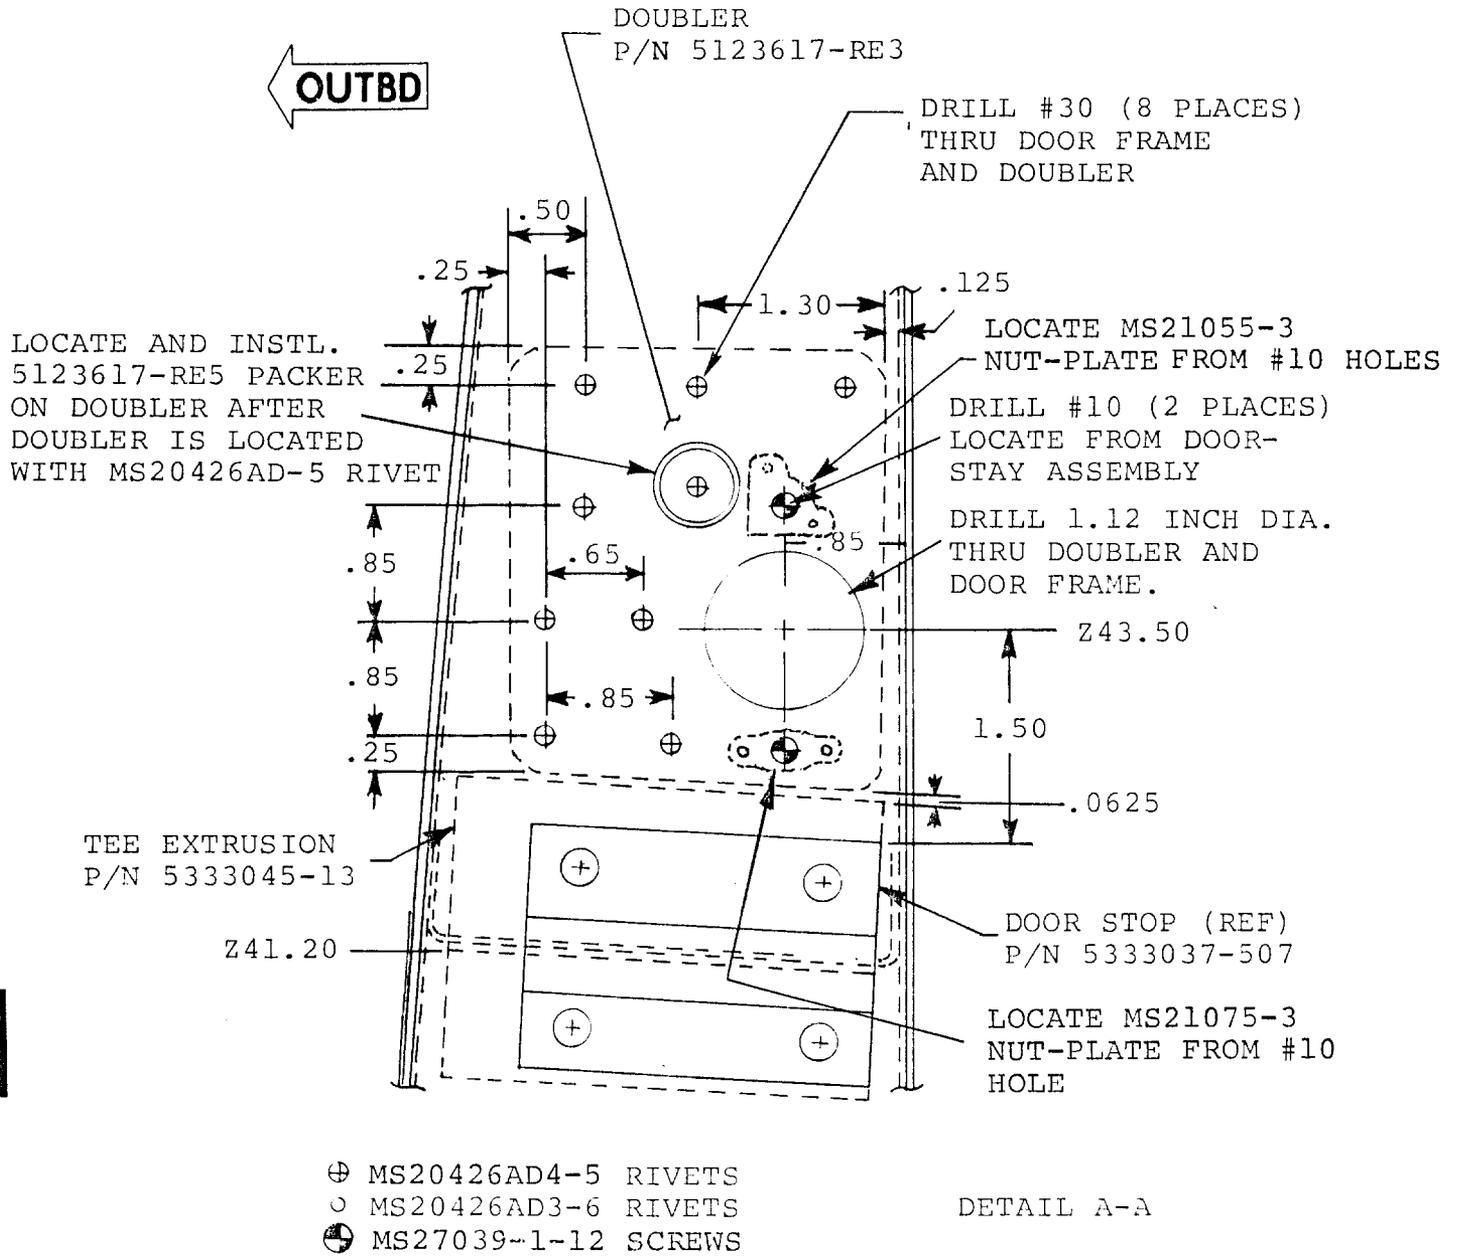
DOUBLE AND DOOR-STAY INSTALLATION
